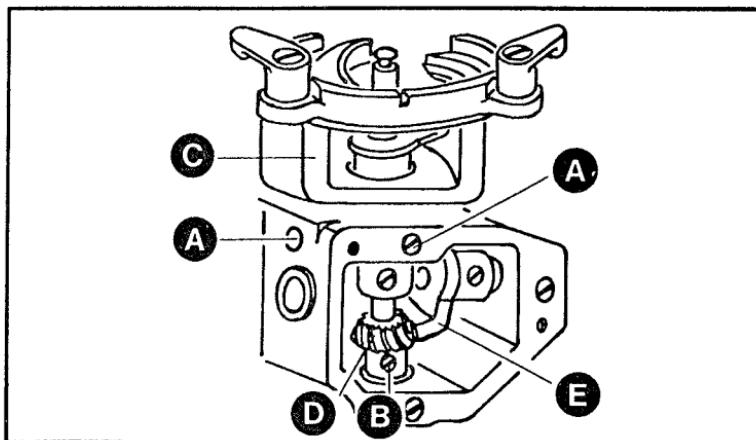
On White Models 782, 793, 804 and 940, the shuttle-needle clearance is set by moving the shuttle body shaft laterally along its axis, making sure that gears D and E are correctly in mesh when you are through.
